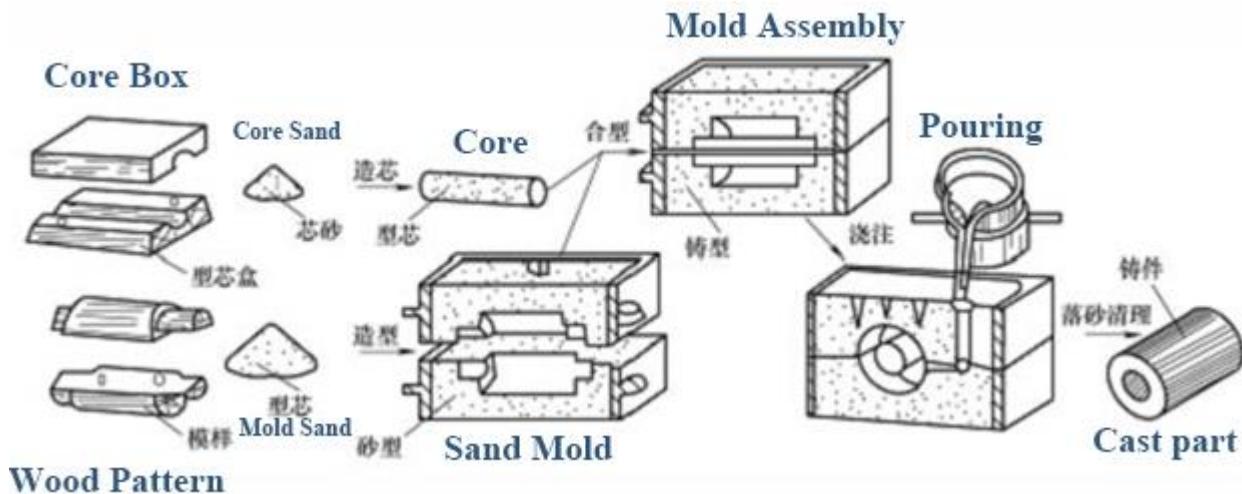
Sequence of sand mould making and subsequent casting process
